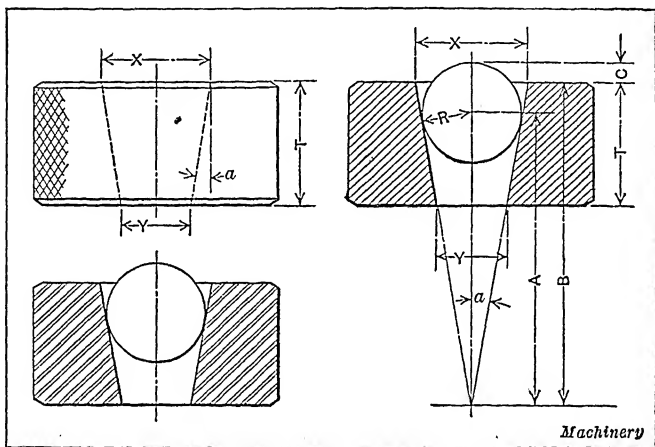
Checking Dimensions X and Y by using One Ball of Given Size
